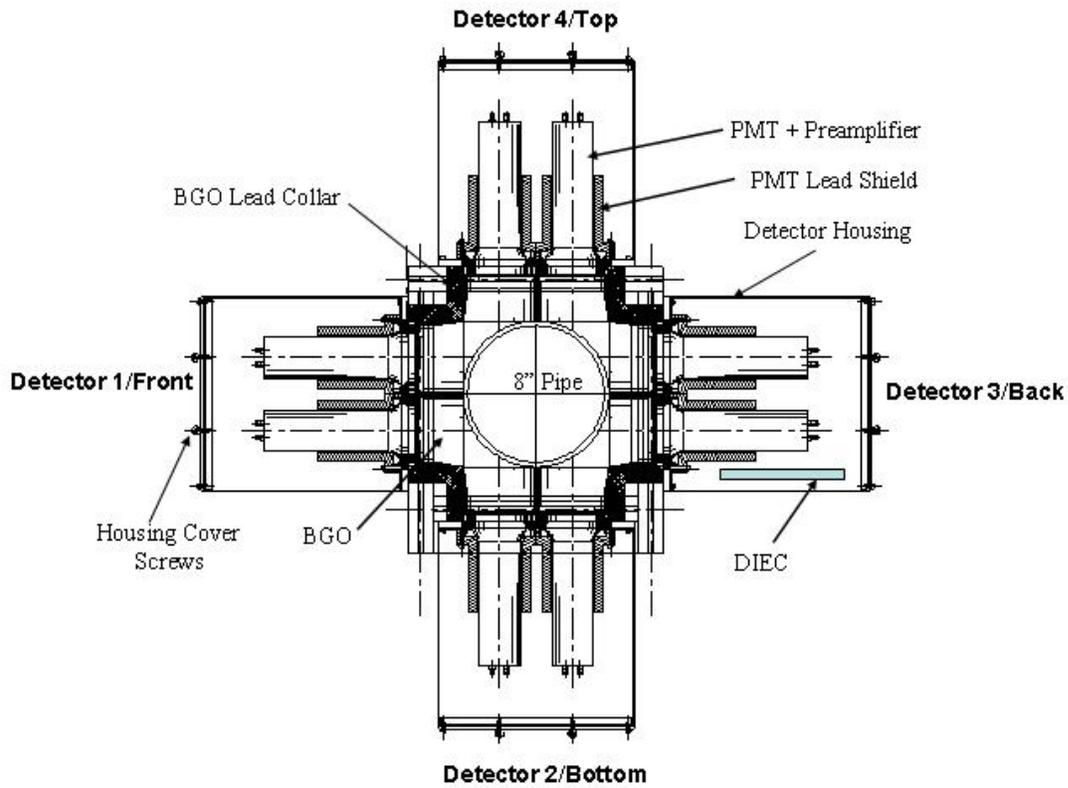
Detailed engineering design drawing showing a cross section of the FMFM detector assembly around a process pipe.
